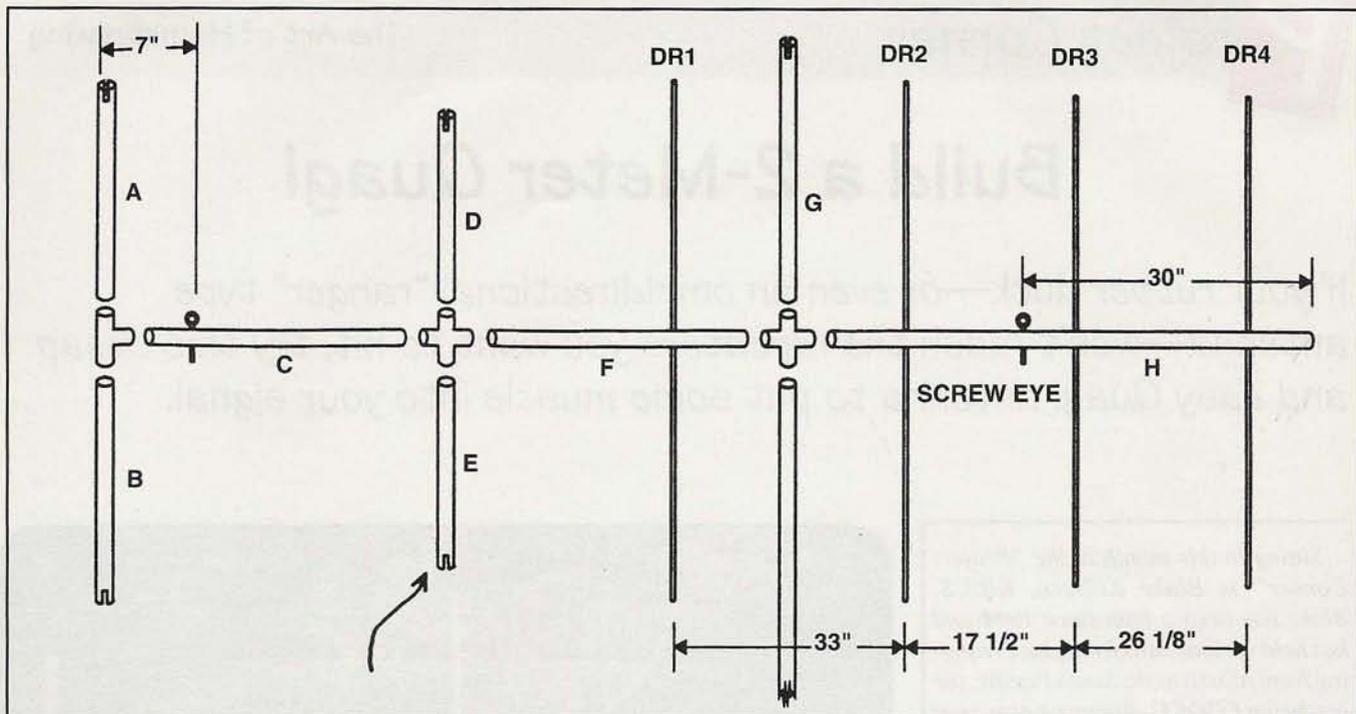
Exploded view of the KI6US Quagi and separation distances for various elements. See the Table for lengths of each of the marked segments. Note that parts D and E, the driven element supports, are shown vertically only for clarity in this illustration. They should be mounted horizontally prior to final gluing.
